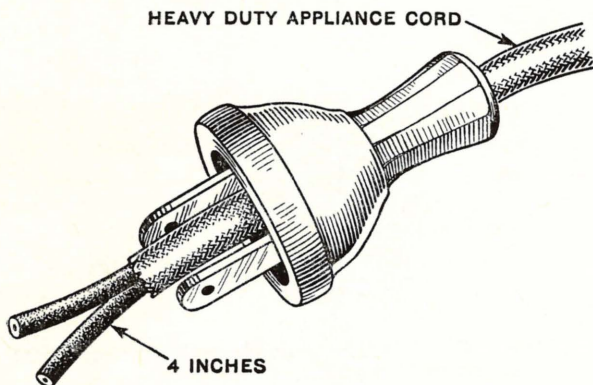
The outside insulation is removed after the cord has been run through the plug
